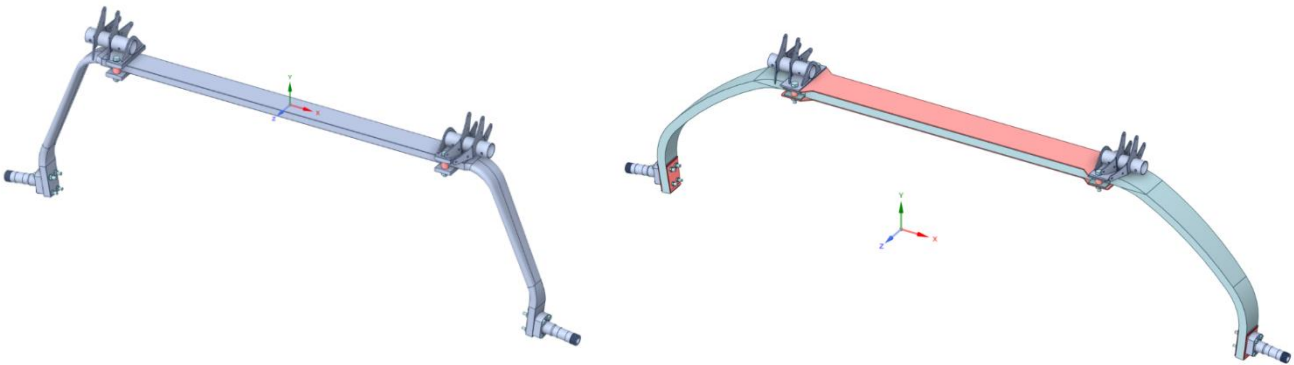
Aluminium 7075 T6 (Left) vs Composite Undercarriage Assembly (Right) (Tri-metric View)
